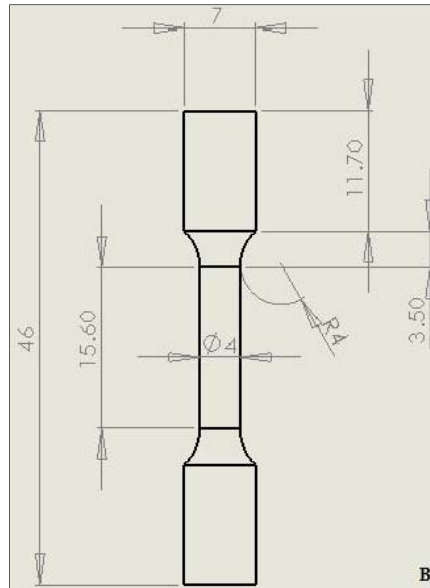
A schematic showing the dimensions of the smooth bar samples machined from 7 mm diameter cylinders.
